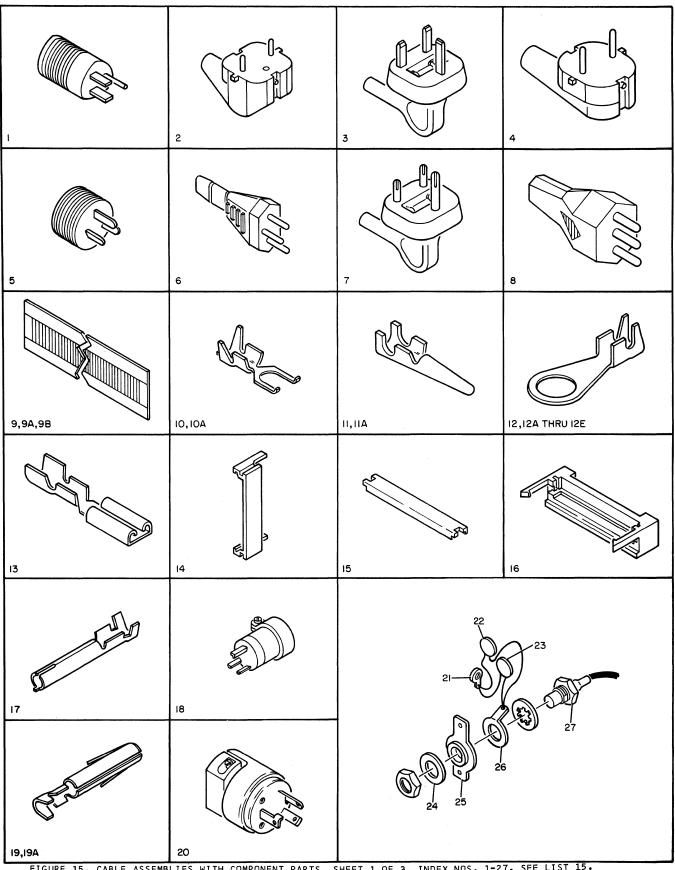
CABLE ASSEMBLIES WITH COMPONENT PARTS. SHEET 1 OF 3. INDEX NOS. 1-27. SEE LIST 15.
